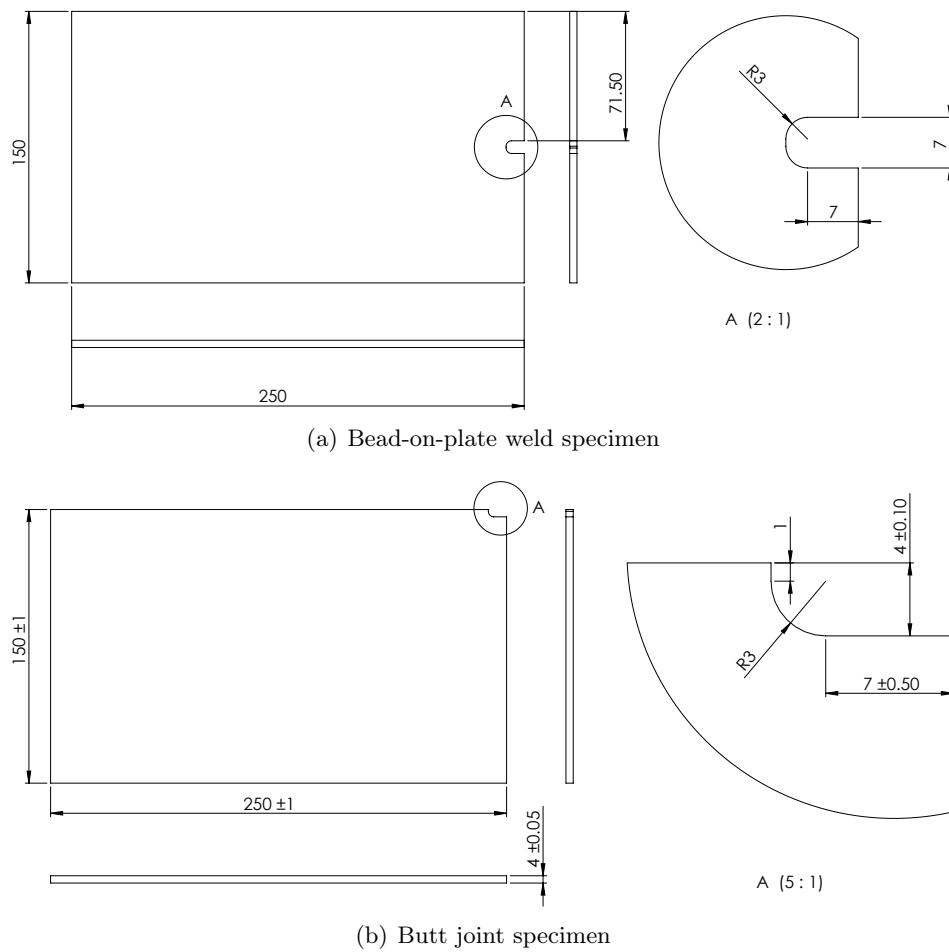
Geometry and dimensions of the welded specimens
